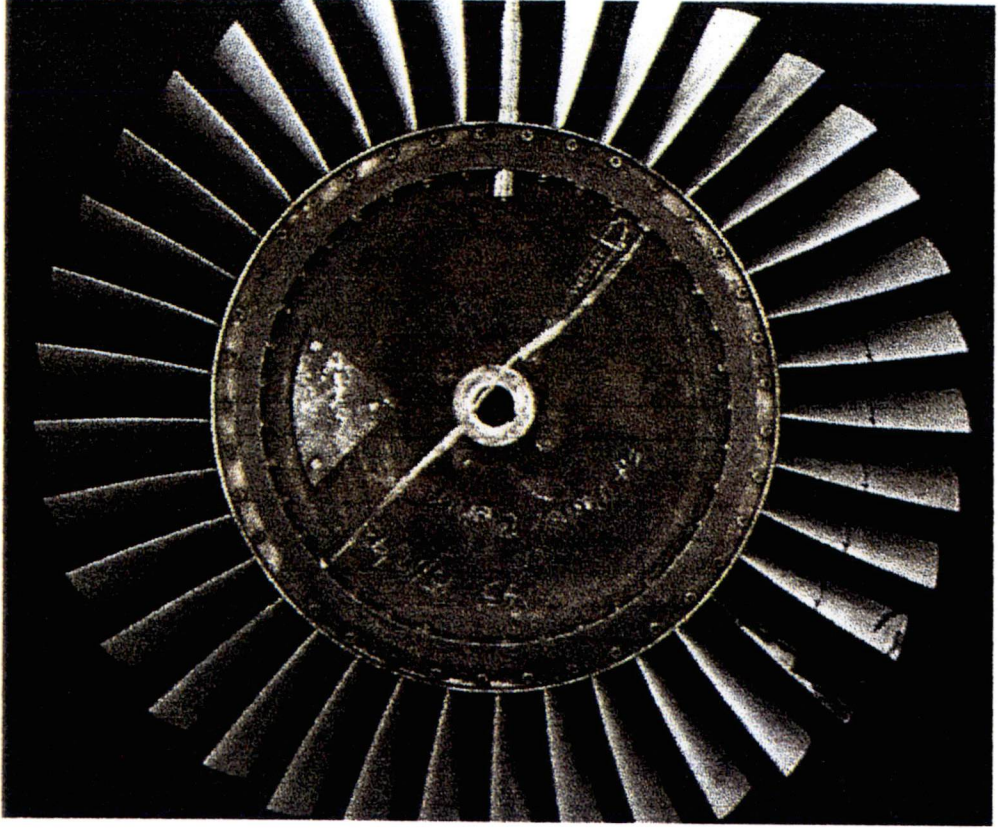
Rotor disc and blade assembly: photograph obtained when the rotor was removed from the machine during the rebuild necessary to alter rotor-stator axial spacing. Blade at top dead centre replaced by pin for support during disc removal process.
